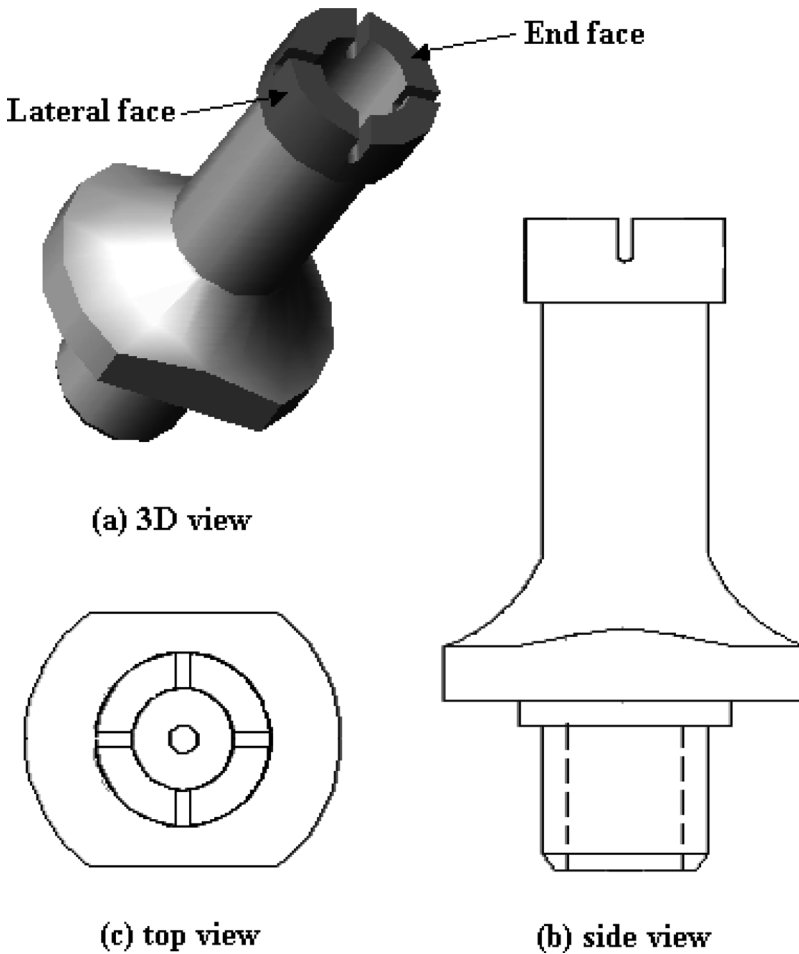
Illustration of the cutting tool for rotary ultrasonic machining.
